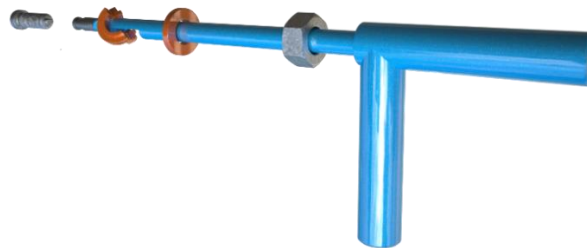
AJAX Bolt Components & The Installation Tool – Ajaxfasteners.com
